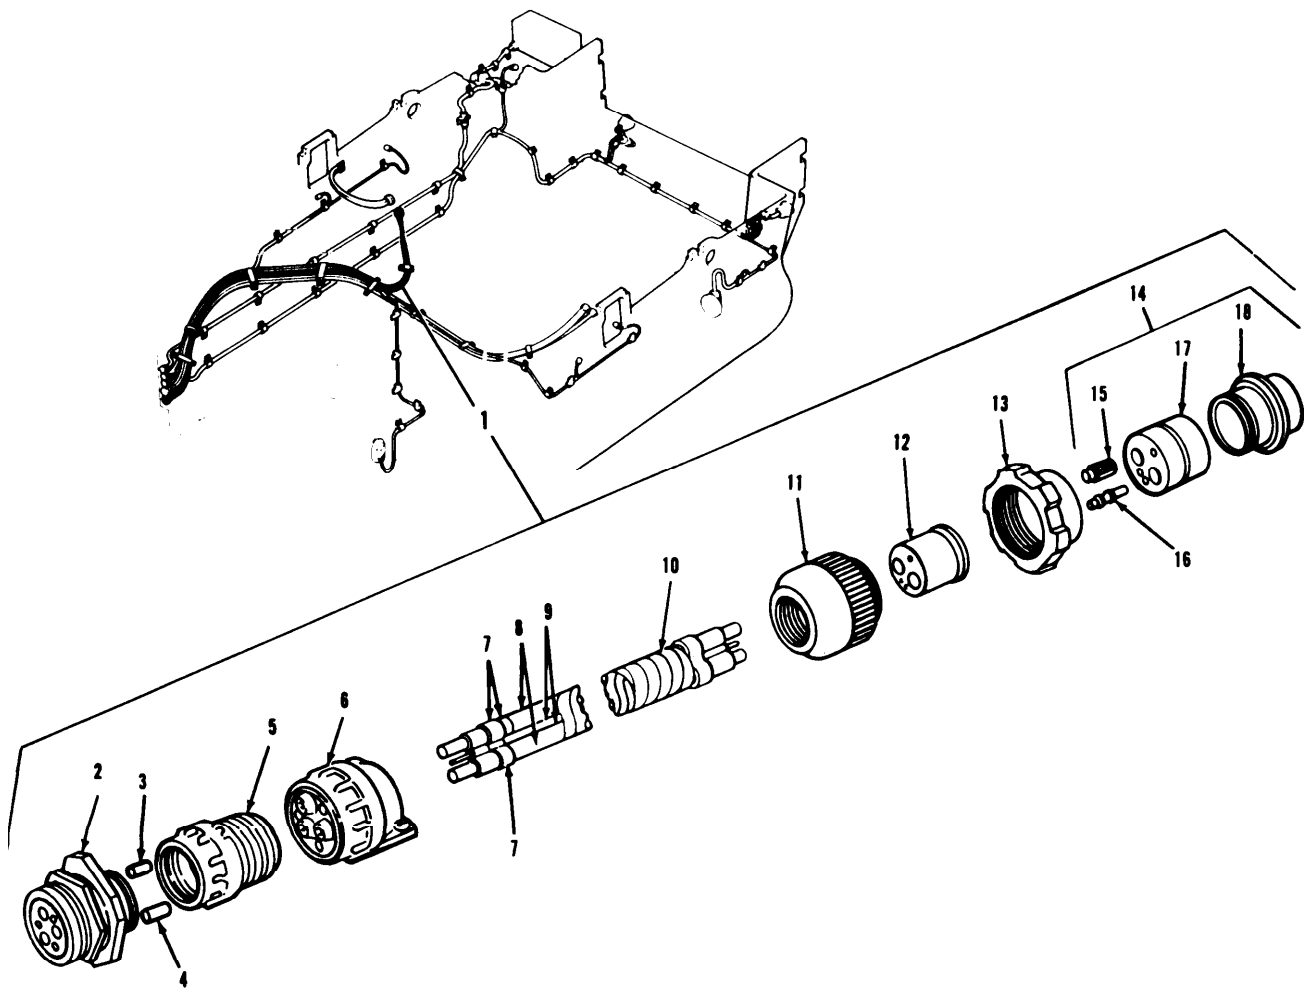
STARTER FEED HARNESS ASSEMBLY (2CA ENGINE).
